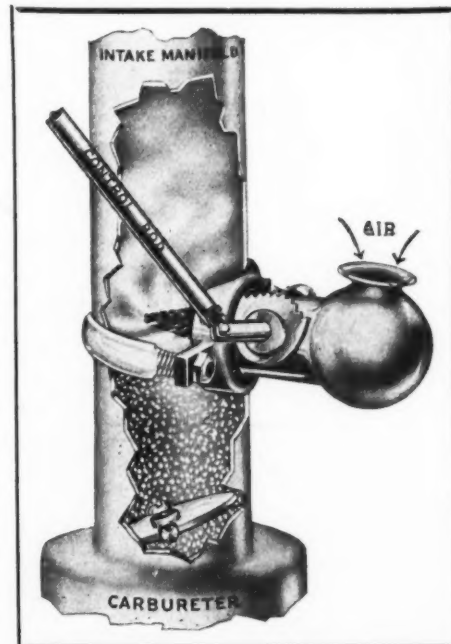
Sectional view, showing attachment of the Michener gasoline saver to the intake manifold of a motor
